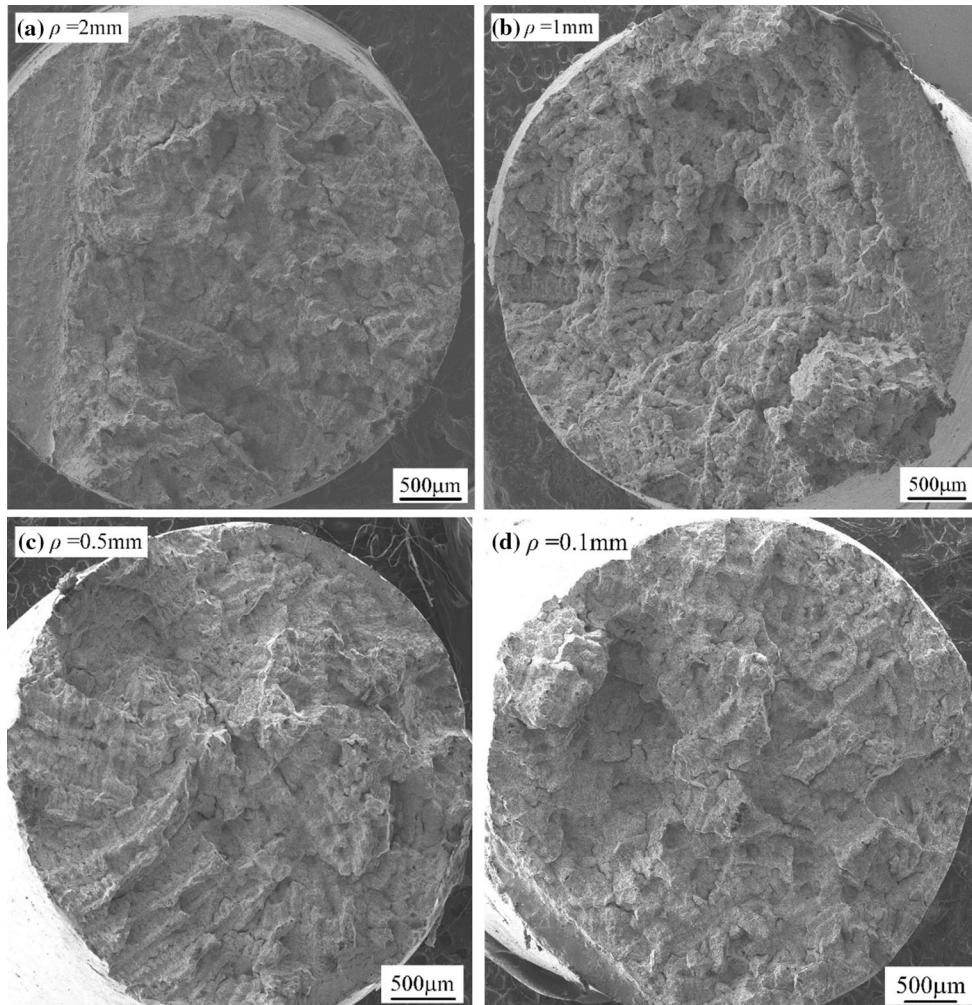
Fracture surface of tensile specimens with different notch depth for K418 alloys
